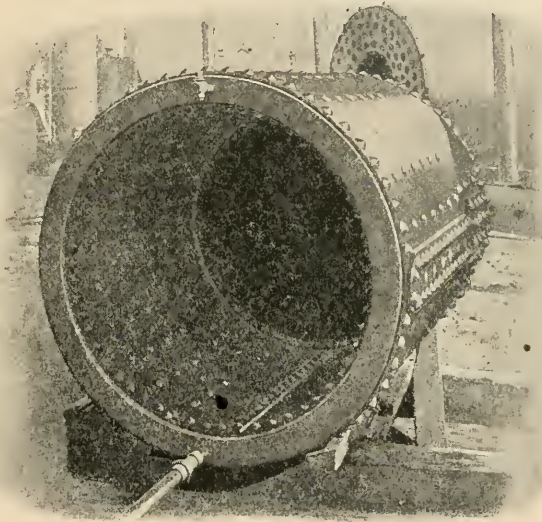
SHOWING THE FURNACE END OF THE BOILER.
